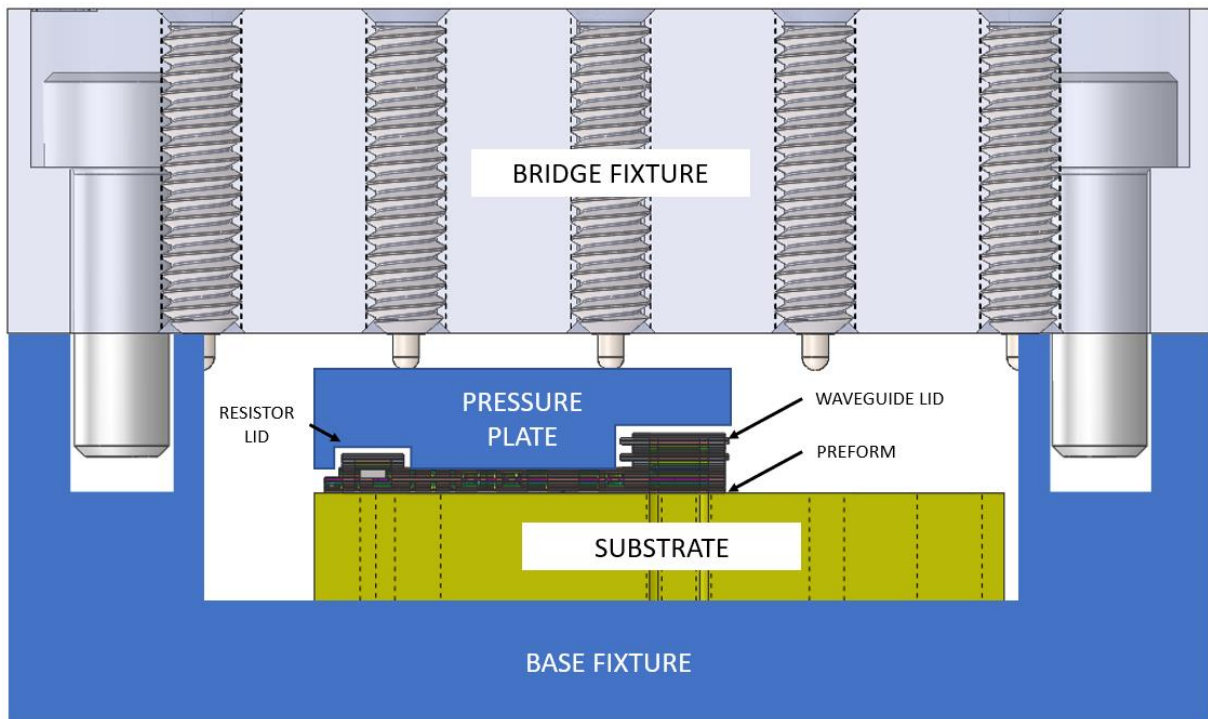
Illustration of a custom mounting fixture set to apply continuous pressure on film epoxy during oven cure with pockets in pressure plate to clear lids.
